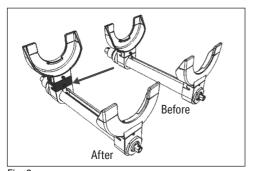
Important: The extensions bracket should NOT be used when operating on a coil spring as both jaws must be the same size.
